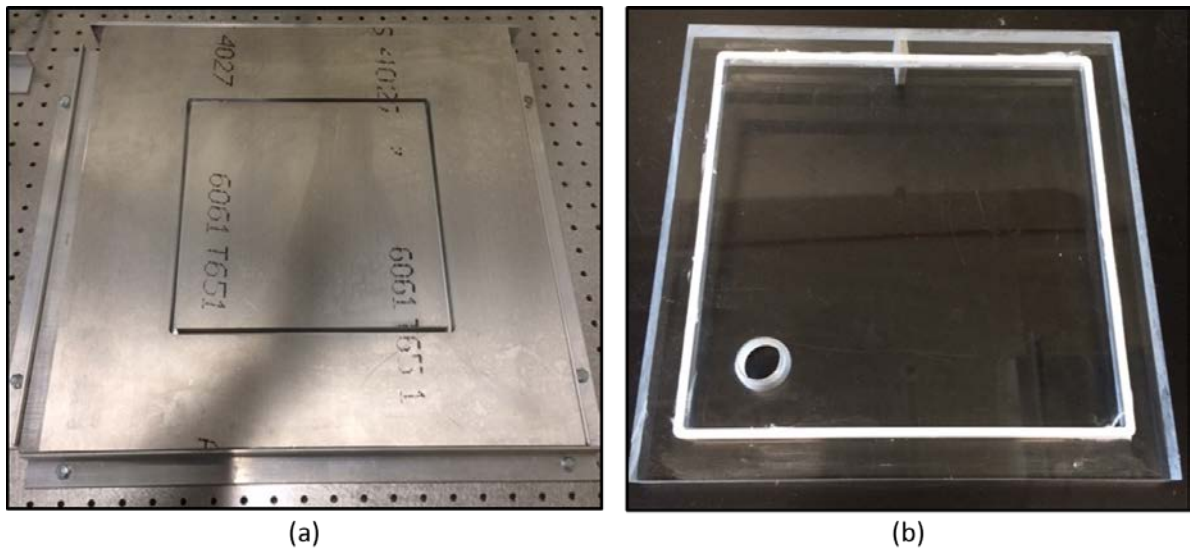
(a) Aluminum bottom plate and (b) PMMA top plate
